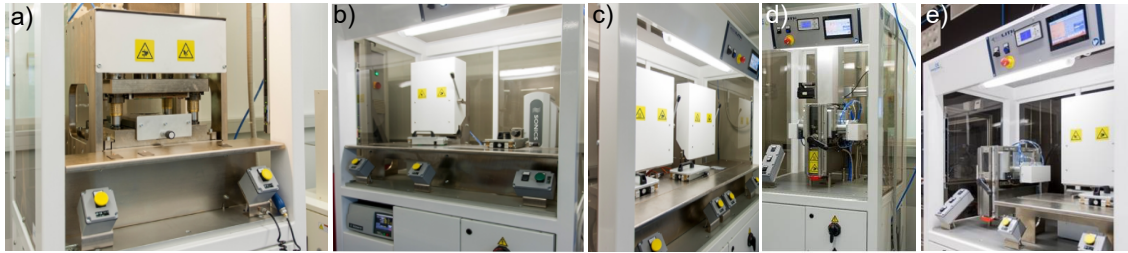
Pouch cell fabrication process equipment: a) Electrode notching machine and cut electrodes; b) Ultrasonic welding equipment; c) Three side sealing equipment; d) Electrolyte filling equipment; e) Cell degassing and final sealing equipment.
